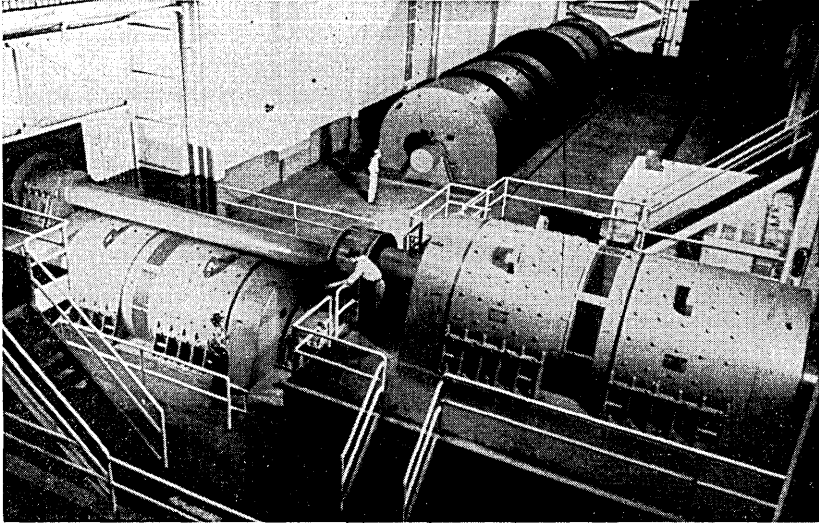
Conversion equipment and drive motors for large blooming mill installation
